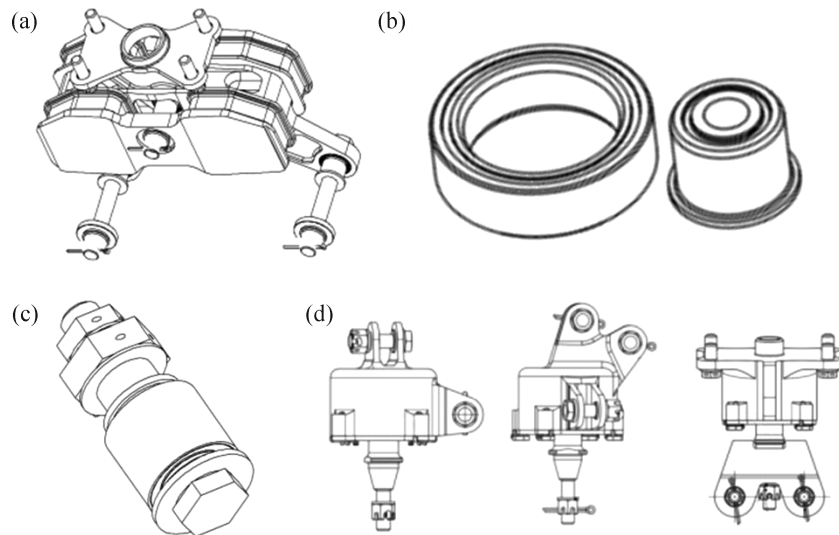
Dampers in main aircraft engine and auxiliary power unit: (a) damper in main aircraft engine; (b) damper in aircraft engine gearbox; (c) bearing damper in auxiliary power unit; (d) box damper in auxiliary power unit
